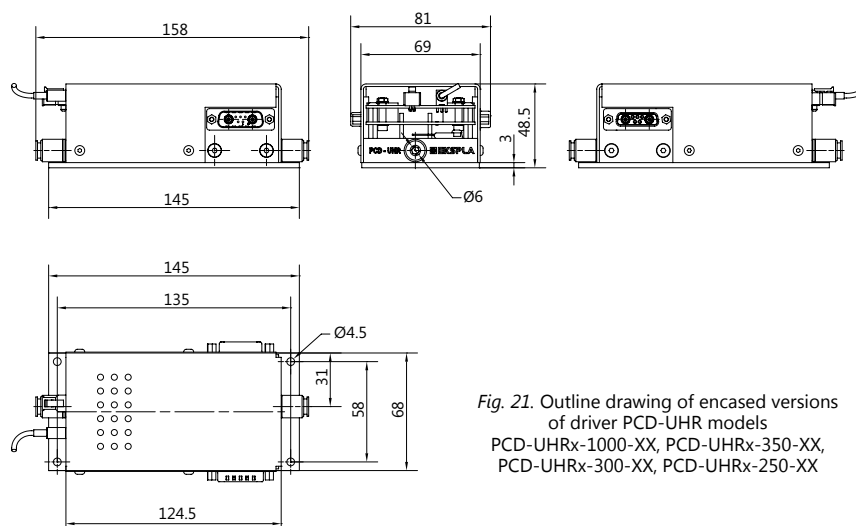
Outline drawing of encased versions of driver PCD-UHR models PCD-UHRx-1000-XX, PCD-UHRx-350-XX, PCD-UHRx-300-XX, PCD-UHRx-250-XX
